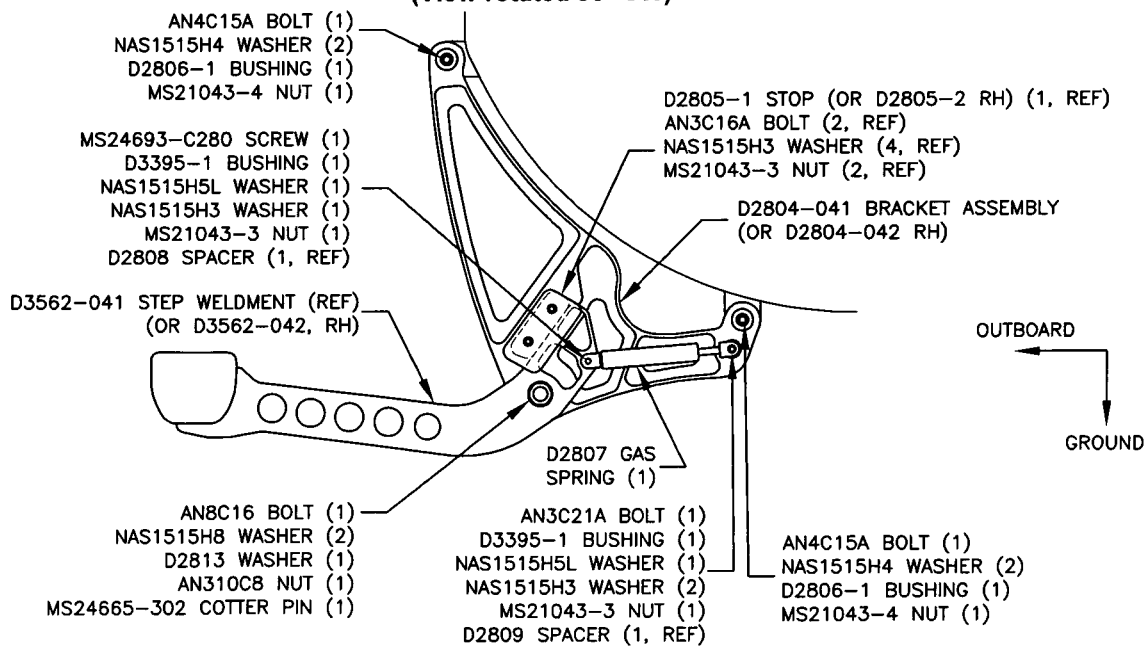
Strut Detail for D412-630-013/-014 *Heli-Access-Step*™ Installation
